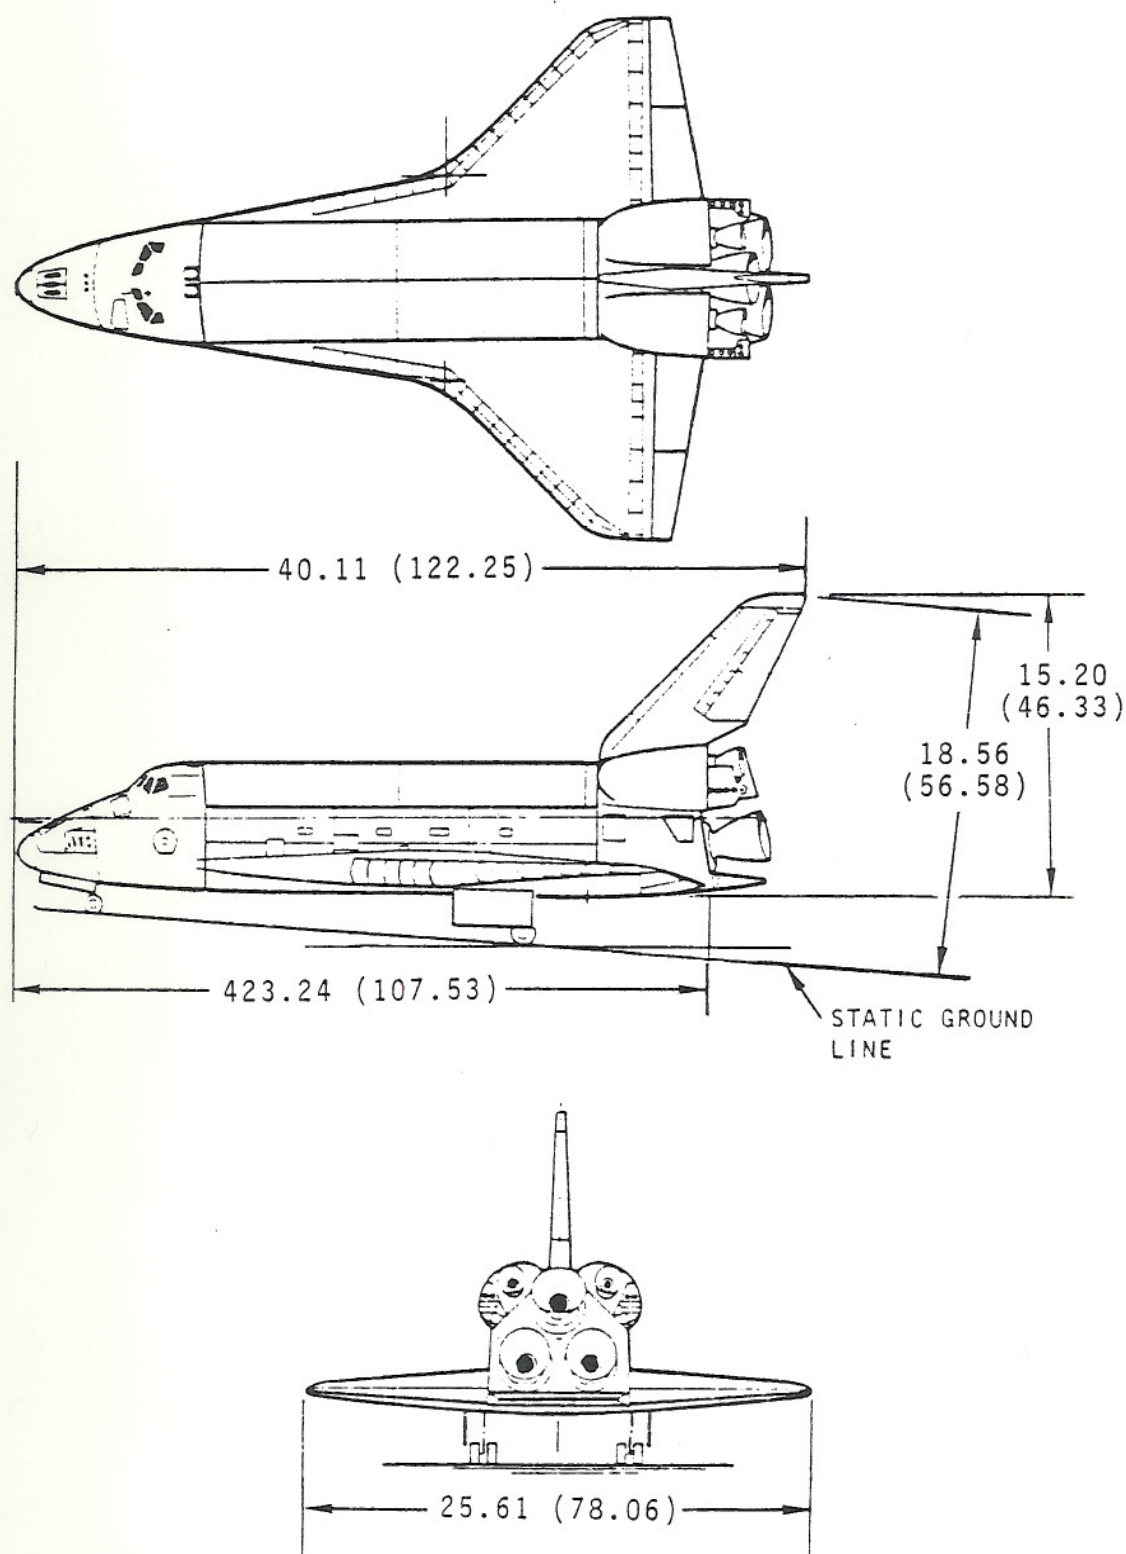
Three-view drawing of the orbiter. Dimensions are in meters (feet).
